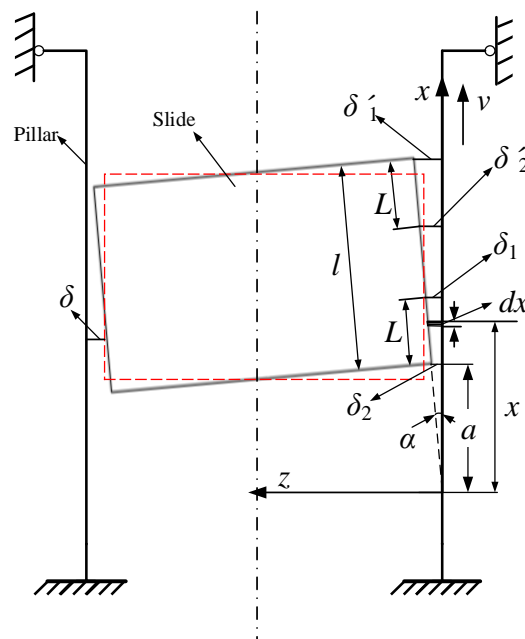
The wedge oil-film clearances in hydraulic press between slide and pillars under eccentric loads.
